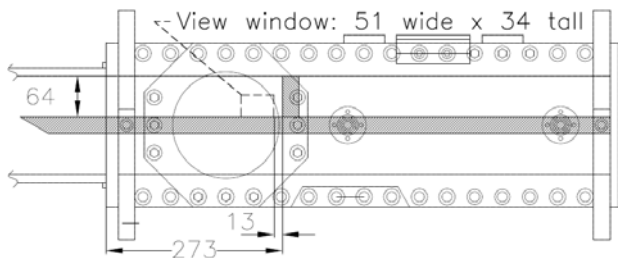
Detail view of the test section for the GDT; dimensions in mm
